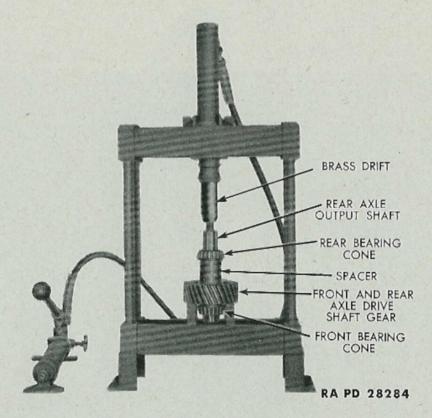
Pressing Bearing Cone, Spacer, and Gear off Rear Axle Output Shaft
